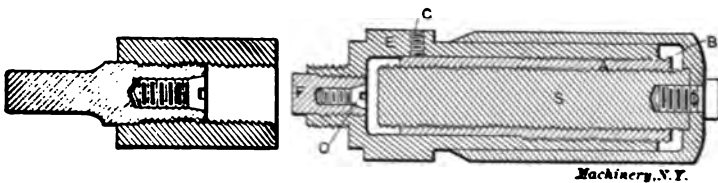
Method of using Micrometer for Internal Thread Cutting
